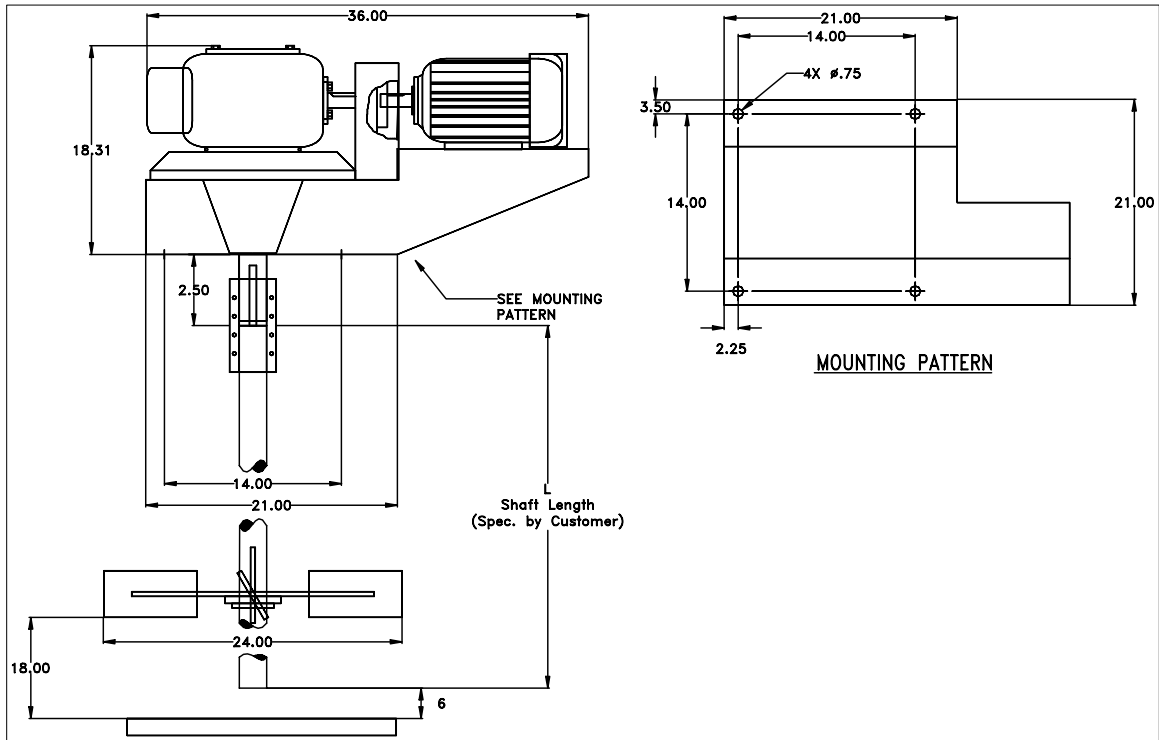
DIMENSIONAL DRAWING MA-3
